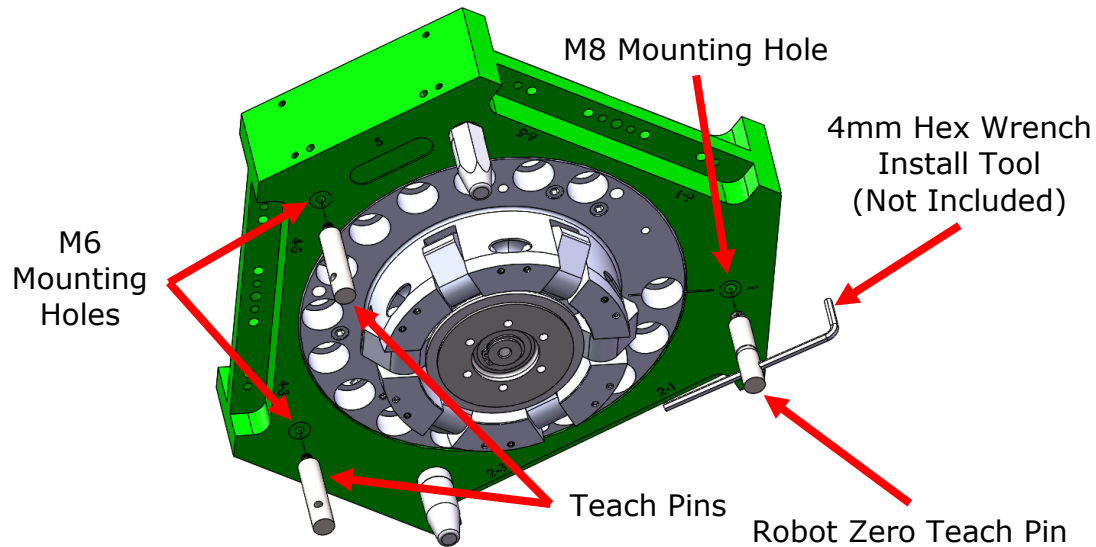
Teach Pin Mounting – E200 Robot Side
